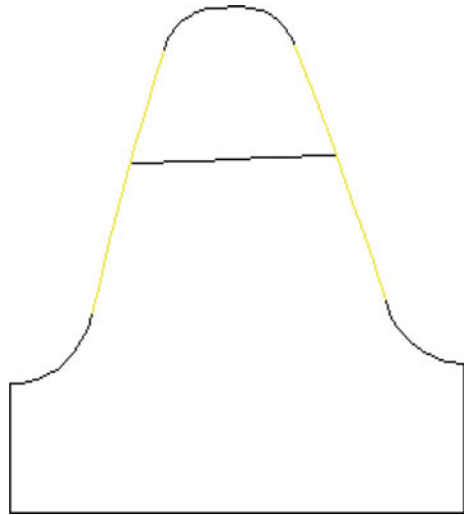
Involute profile of symmetric gear tooth with elliptical¹ root fillet
